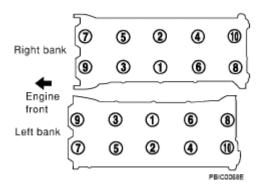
Identifying Cylinder Head Bolts Removing Sequence
